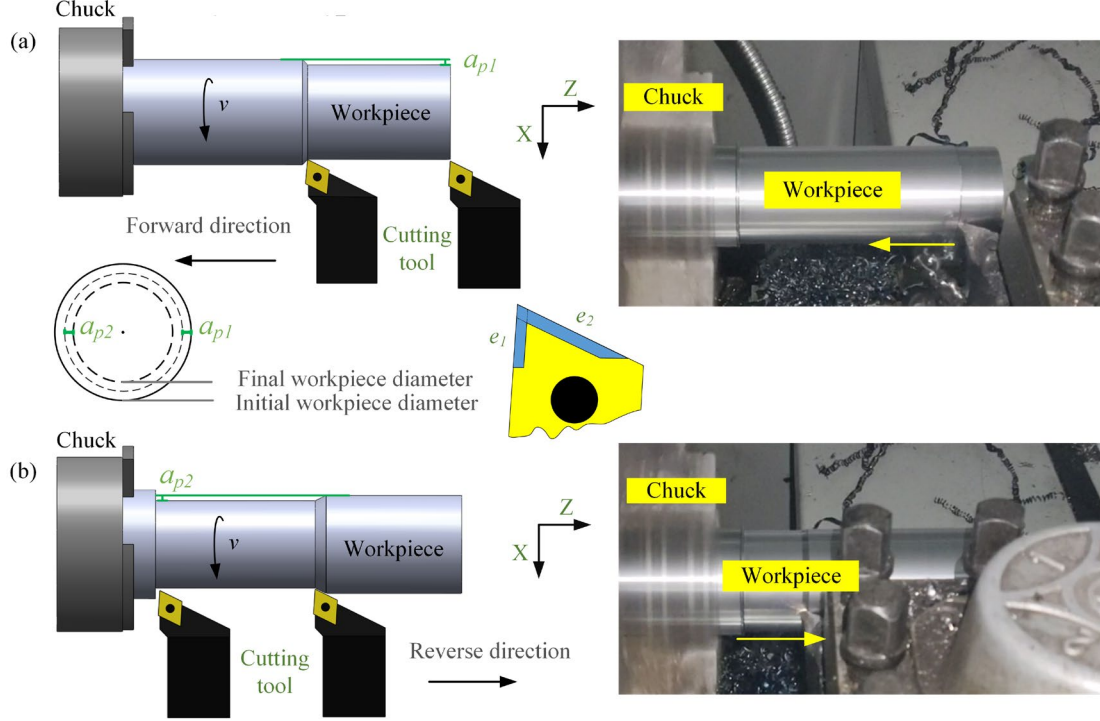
The machining mechanism of MDT. (a) The machining process of forward turning; (b) The machining process of reverse turning.
